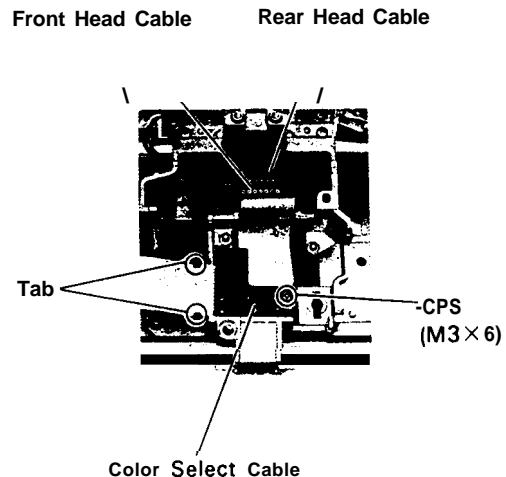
Front Head Cable, Rear Head Cable, and Color Select Cable Removal
